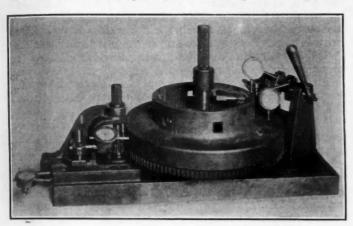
FIXTURE FOR CHECKING FLYWHEELS
